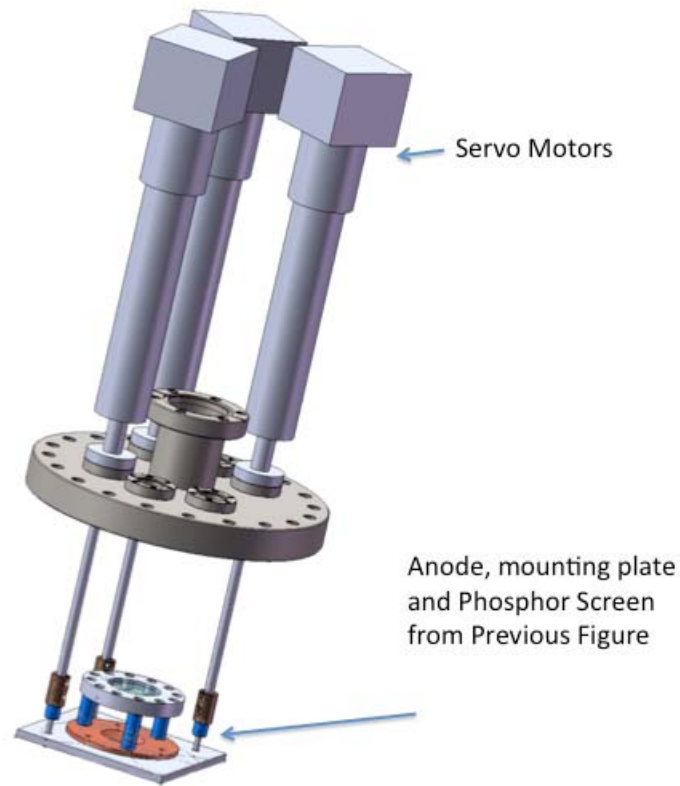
Solidworks composite of the upper cathode test cell assembly.
